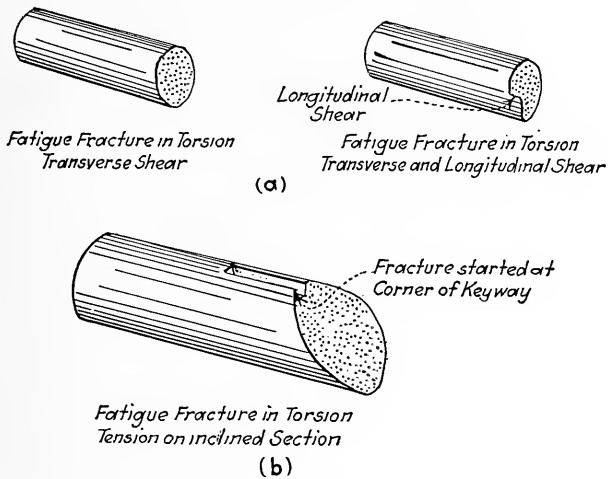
Typical fatigue fractures in torsion.
